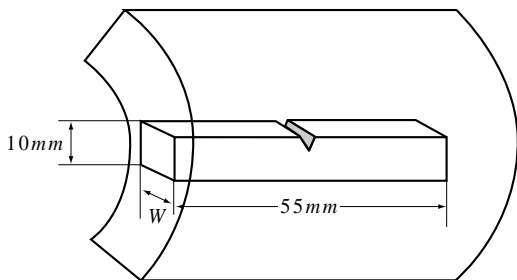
The position of selection for impact test specimen taken from the seamless steel pipes and other portions than weld zone of electric-resistance welded steel pipes
